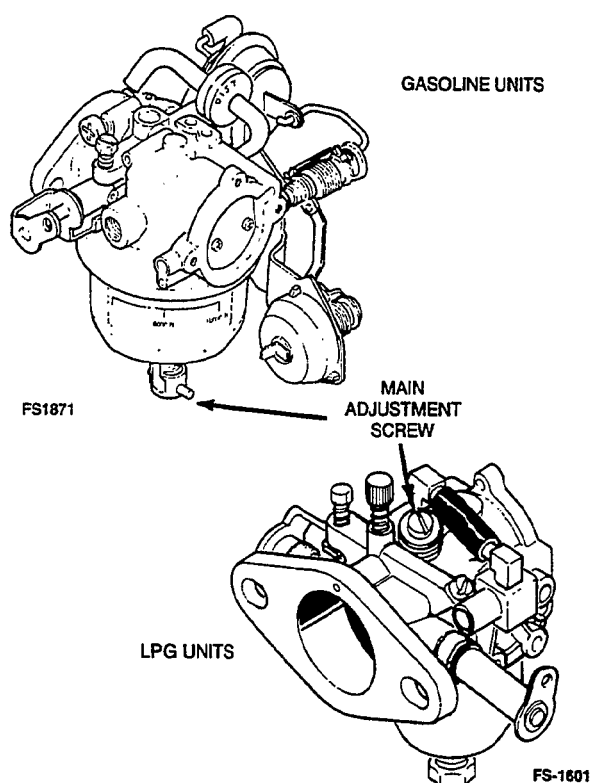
CARBURETOR MAIN ADJUSTMENT SCREWS
